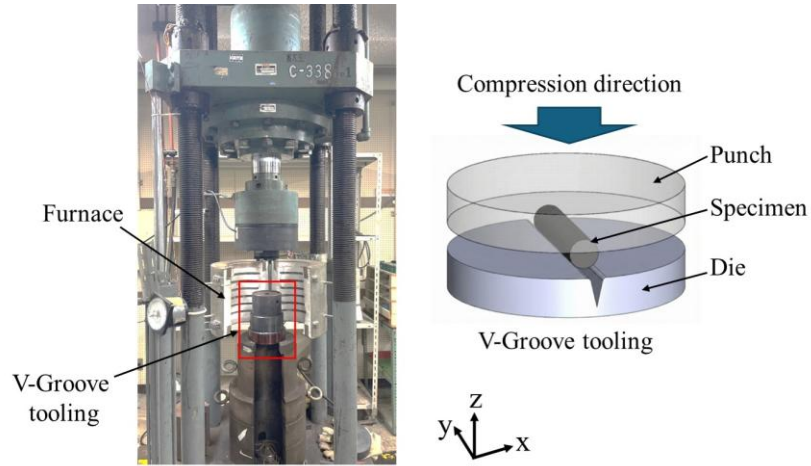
The 100-ton vertical hydraulic press machine and V-groove tooling used for hot friction testing.
